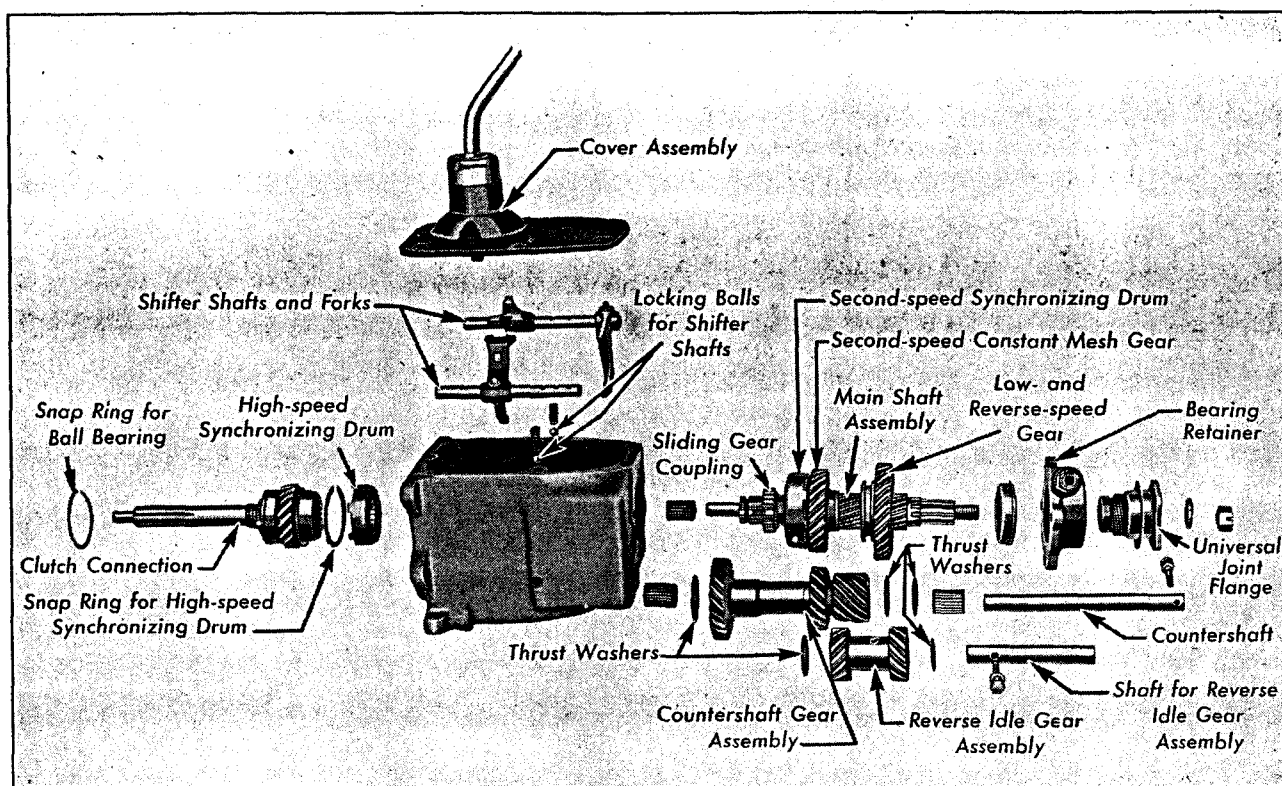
(Fig. 25) Exploded View of LaSalle Transmission
